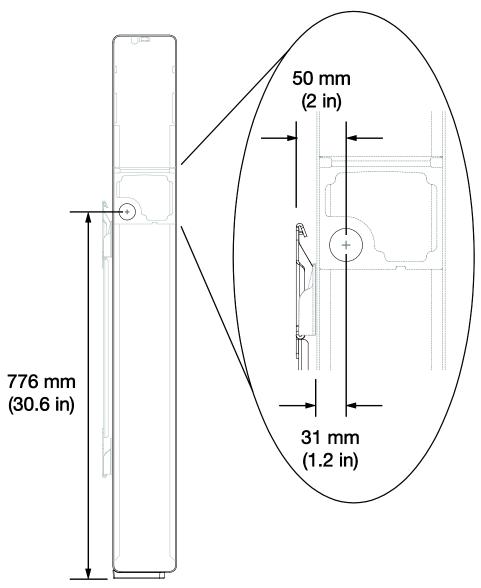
Powerwall 2 AC Side Cable Port Entry location
